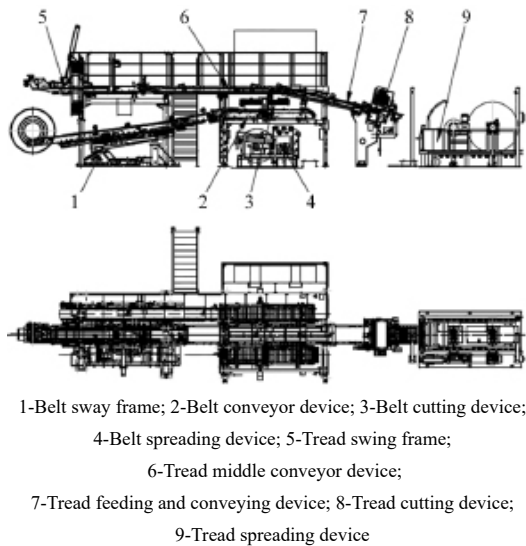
Feed device for the belt drum station of traditional micro-card forming machine
